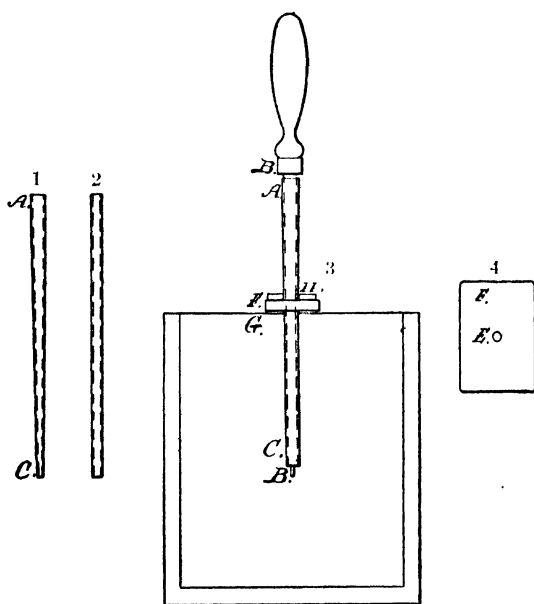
Carpenter's Process of Reducing Celluloid Tubes to Taper.
